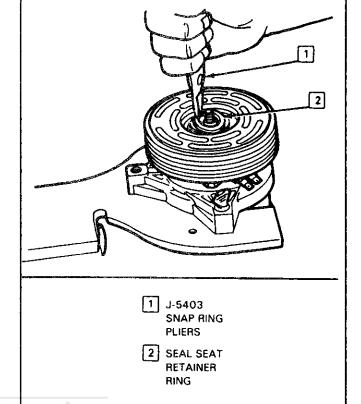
Removing or Installing Shaft Seal Retaining Ring
